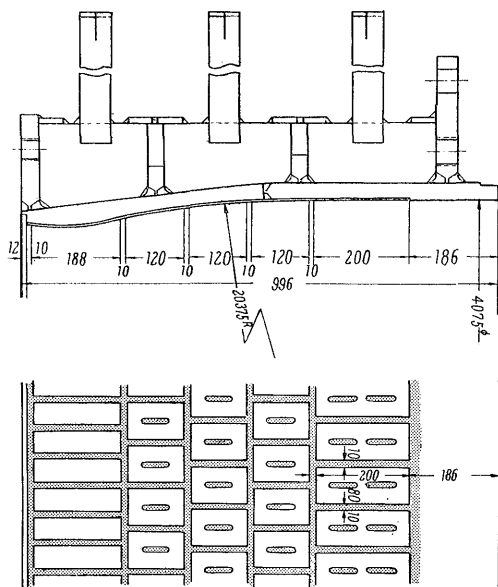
Stainless steel plate liner on inner surface of discharge ring
